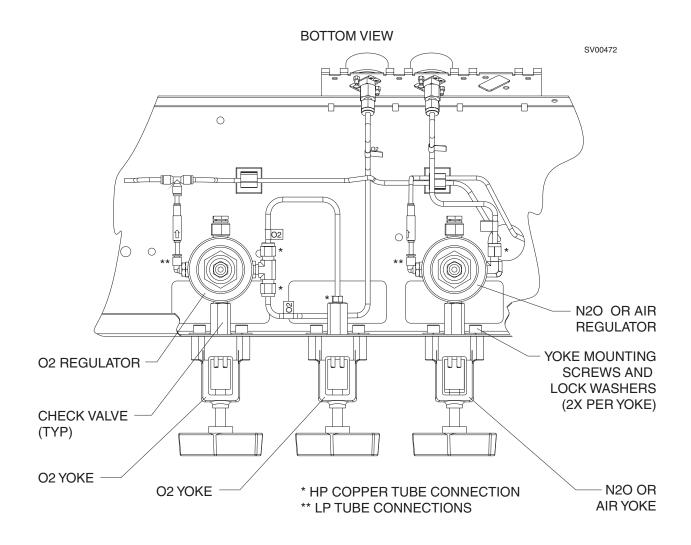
Cylinder Yoke and Regulator Assemblies
